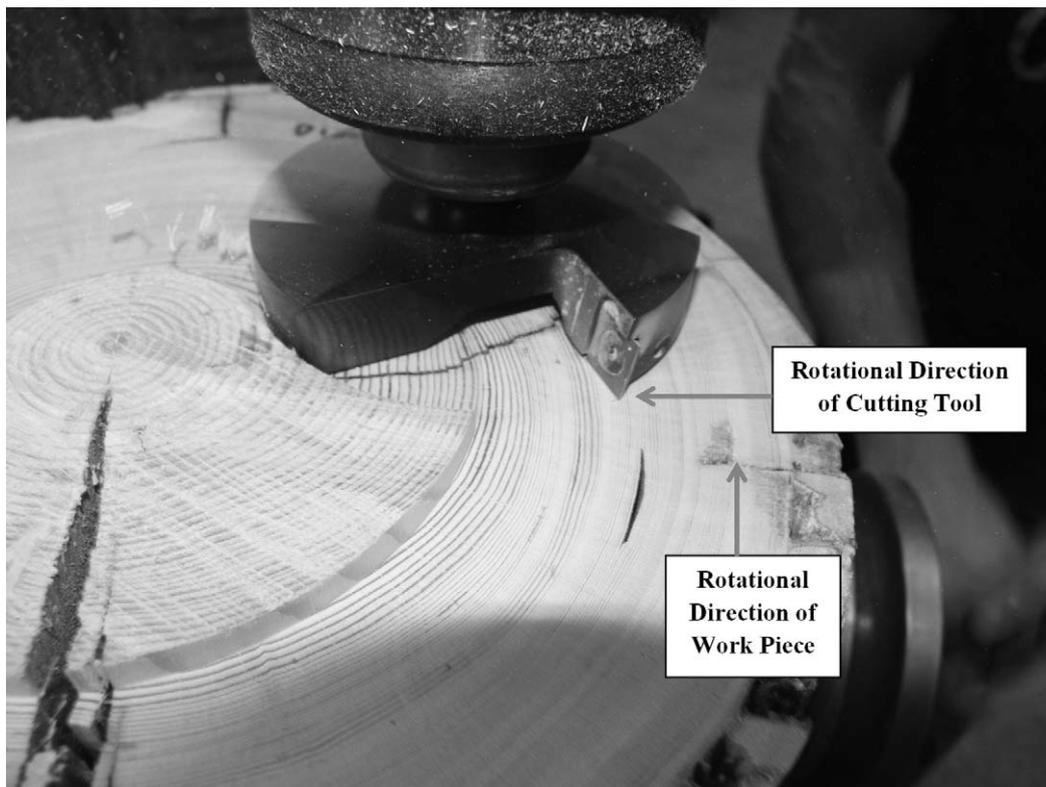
High-speed photo freezing the rotary cutting tool during processing. The sample is being slowly turned counterclockwise (from top perspective) on a turntable beneath. The cutting tool is spinning at 4,200 RPM clockwise (from top perspective) and is set to remove material to a depth of no more than 5.0 mm (*ca.* 0.200 in). In this example the cutting tool is moving across a natural crack in the sample log.
